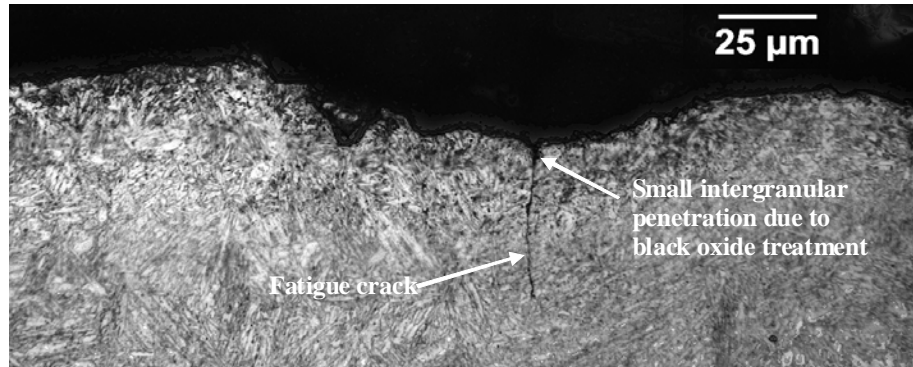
Example of a service fatigue crack starting from a small intergranular surface penetration caused by a black oxide coating process. The penetration was at the base of a coarse machining groove on a landing gear trunnion made from AISI 4340M ultrahigh strength steel. The trunnion surface had not been shot peened (as required) prior to the black oxide treatment.
